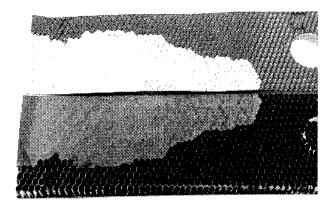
Failure surfaces resulting from peel testing of the Dura-Core honeycomb and JD Lincoln adhesive conditioned 30 days at 70°C/100%R.H., indicating fillet bond pull-out and skin to adhesive failure.
